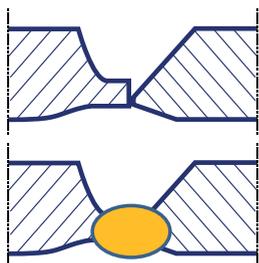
Weld bead in plate position (on top) and in overhead position (bottom)
